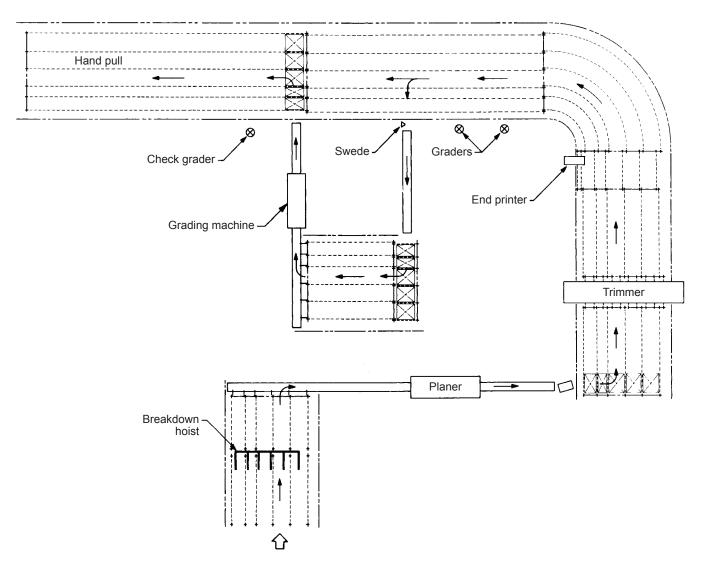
Planing mill arrangement in which graders hand-select pieces to be routed by swede to grading machine.
